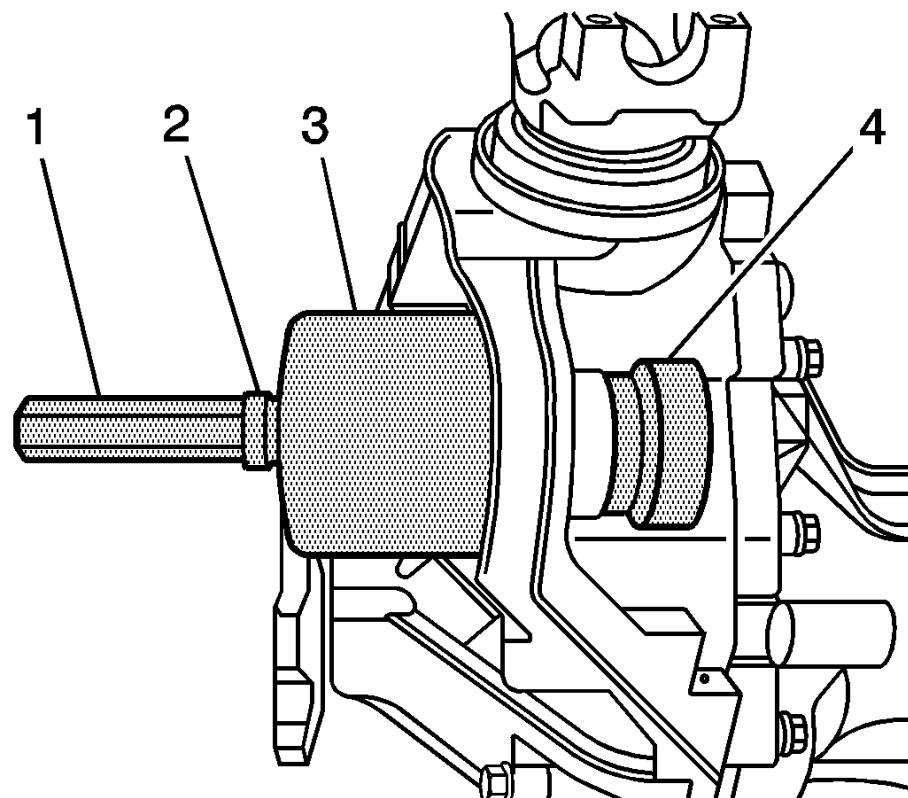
Lower Differential Carrier Assembly Bushing And Remover
